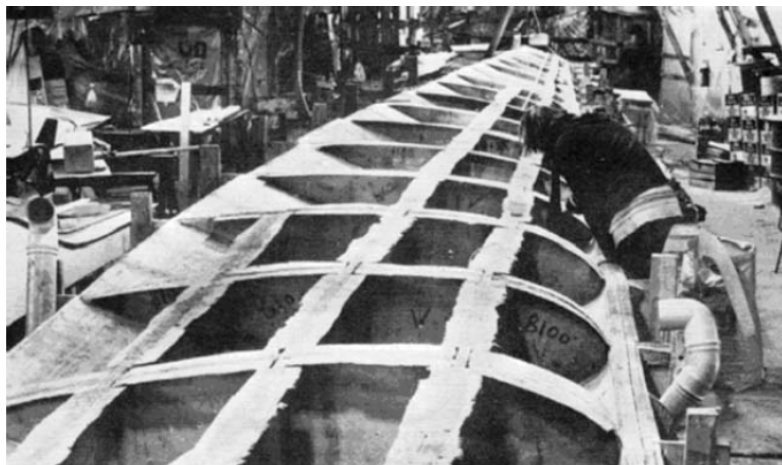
Manufacturing of the thermoset composite skin-spar-web assembly of a Twind wind turbine blade [5].
